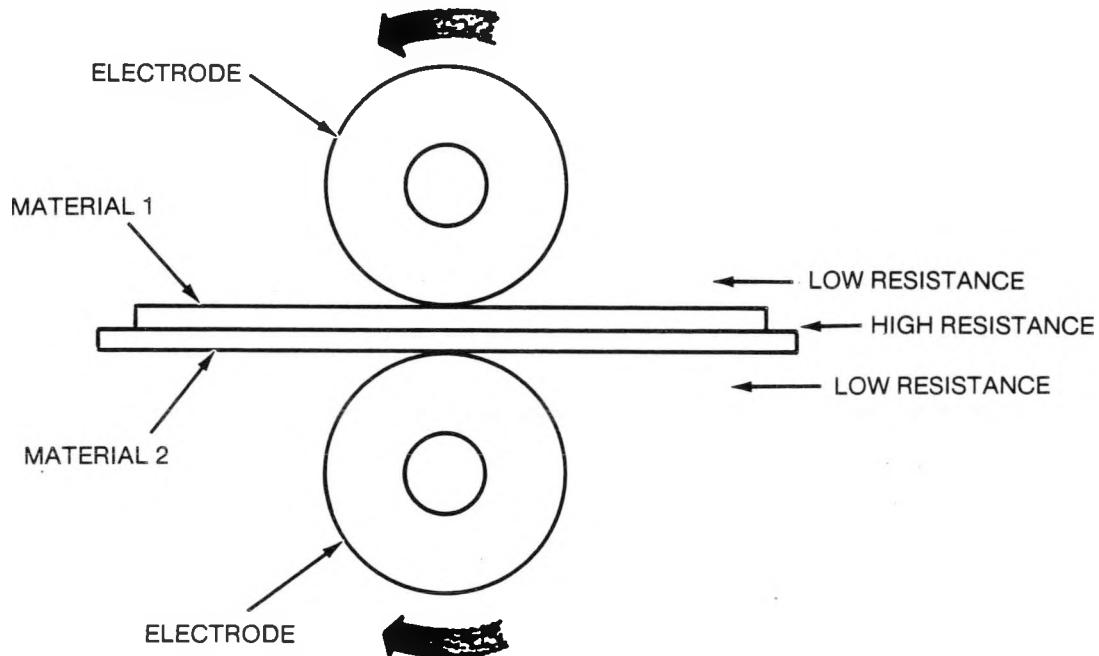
Opposed Electrode Resistance Seam Weld
